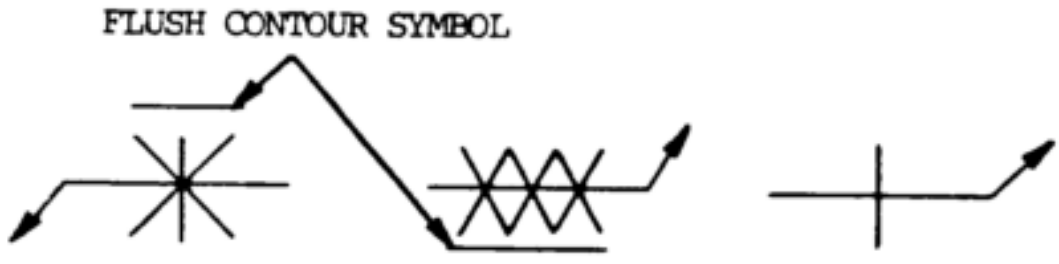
Spot, seam, and flash or upset weld symbols.
